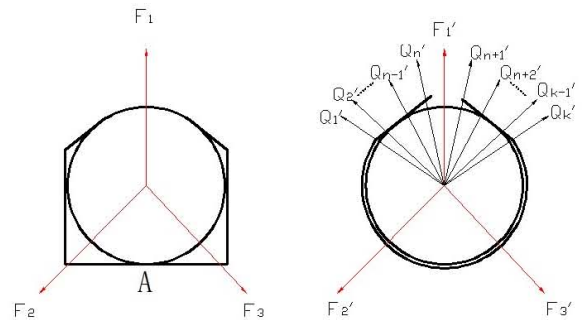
The image of the force situation of rectangle part and cylinder parts
